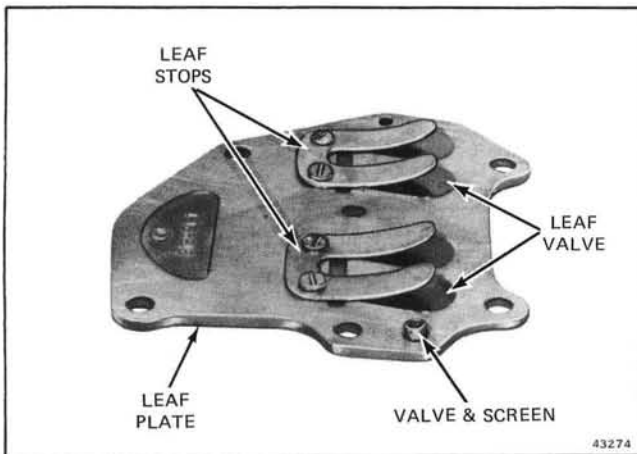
Leaf Plate, Valve and Screen Assembly
